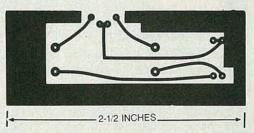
FULL-SIZED FOIL PATTERN for the TCC board. That board mounts in the conversion box.
